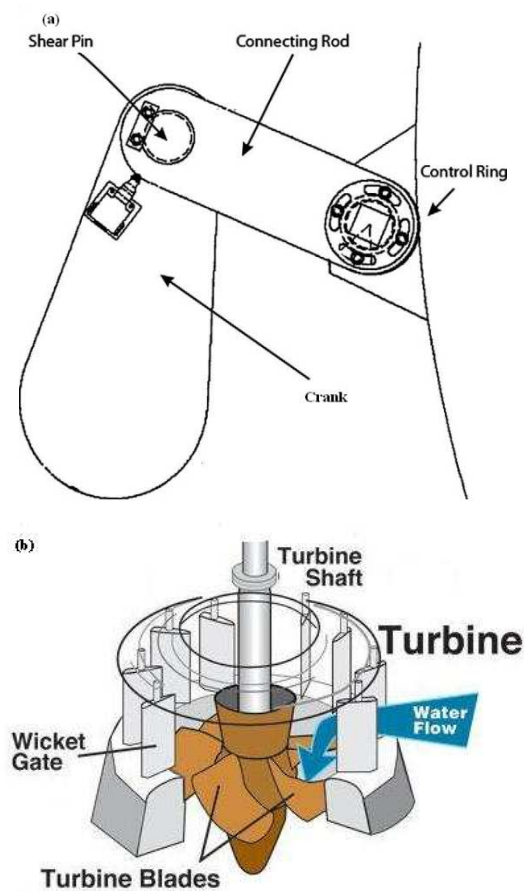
(a) Shear pin and crank-rod assembly, (b) Kaplan Turbine – adapted from www.wikipedia.com
